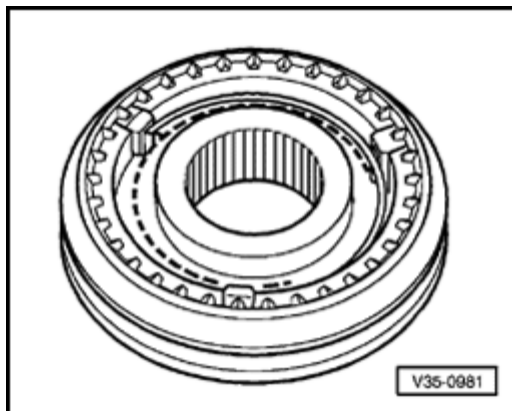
Assembling 5th and 6th gear locking collar/synchro-hub
